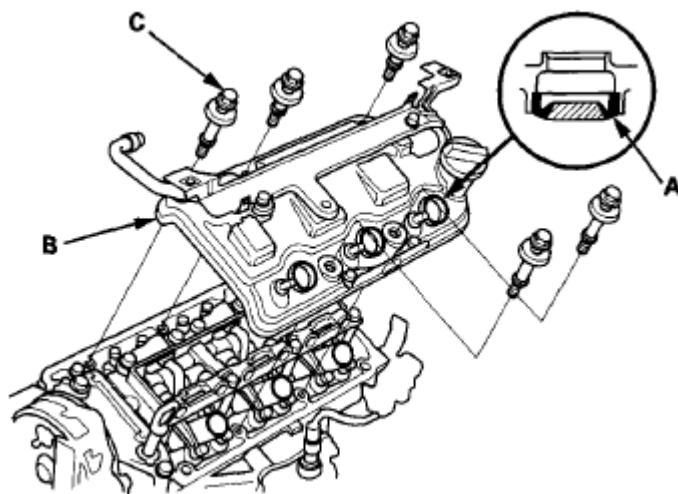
Setting Spark Plug Seals On Spark Plug Tubes
